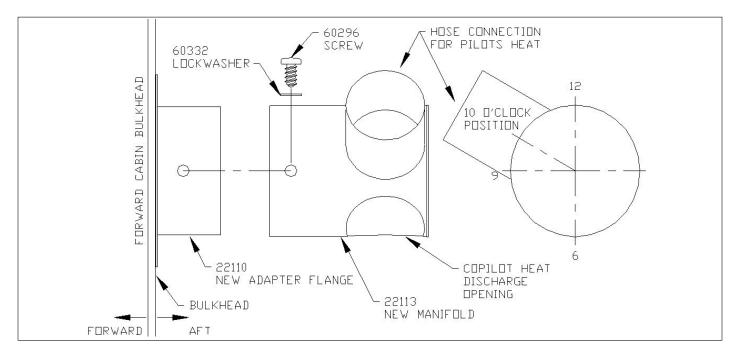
Manifold P/N 22113 or P/N 22127 Installation
